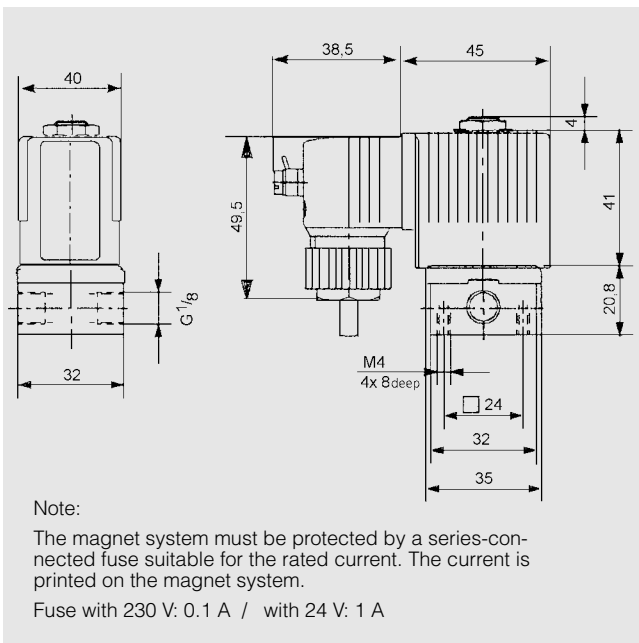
/26 2/2-way solenoid valve made of stainless steel, explosion-proof
